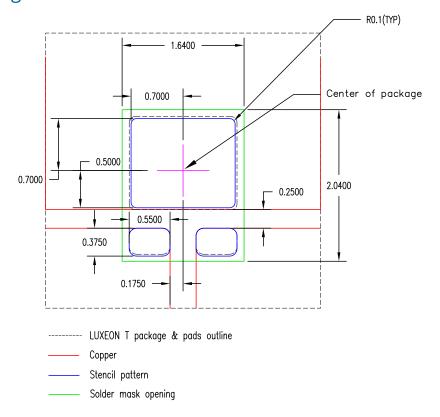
Recommended PCB solder pad layout for LUXEON T.
